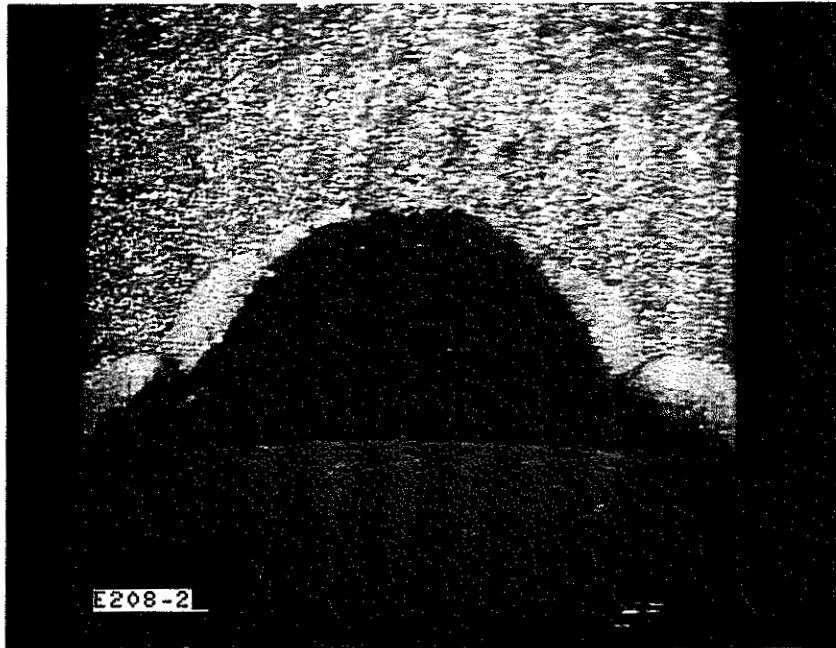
Above: Fracture surface of a compact tension specimen after fracture toughness testing;
